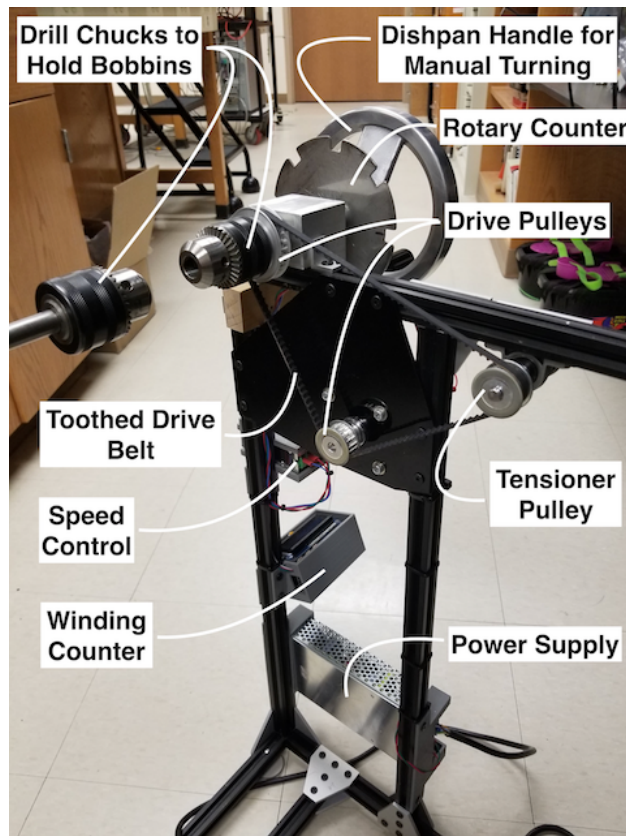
Drive Train. Full drive train depicted with major electronic components installed.
